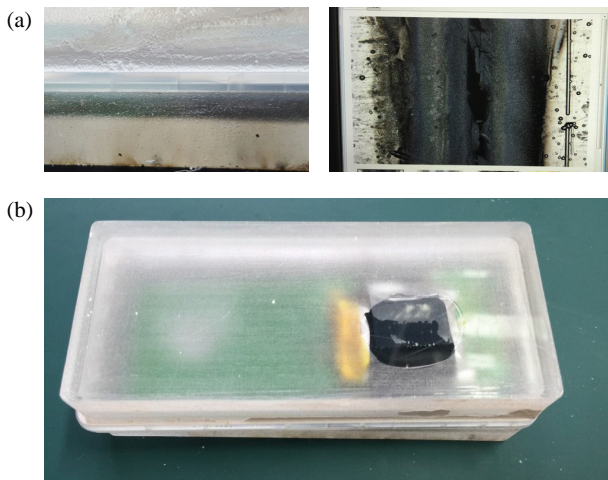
(a) Cross-section of bonded packaging using CO₂ laser and (b) shape of biocompatible packaging.
